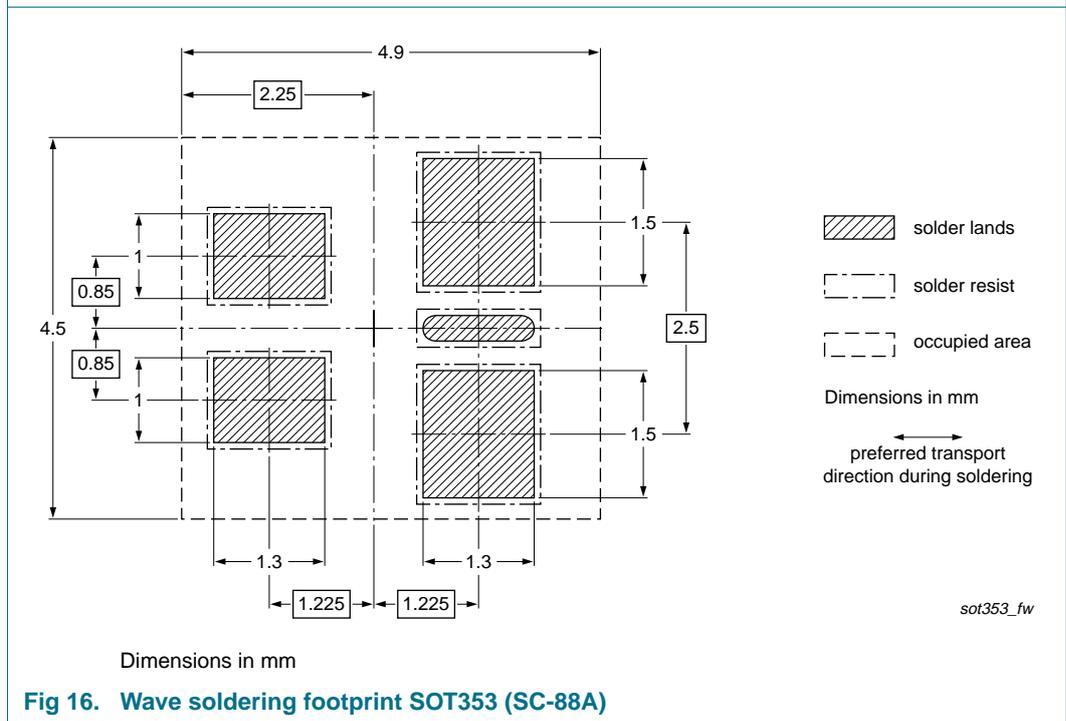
Wave soldering footprint SOT353 (SC-88A)
